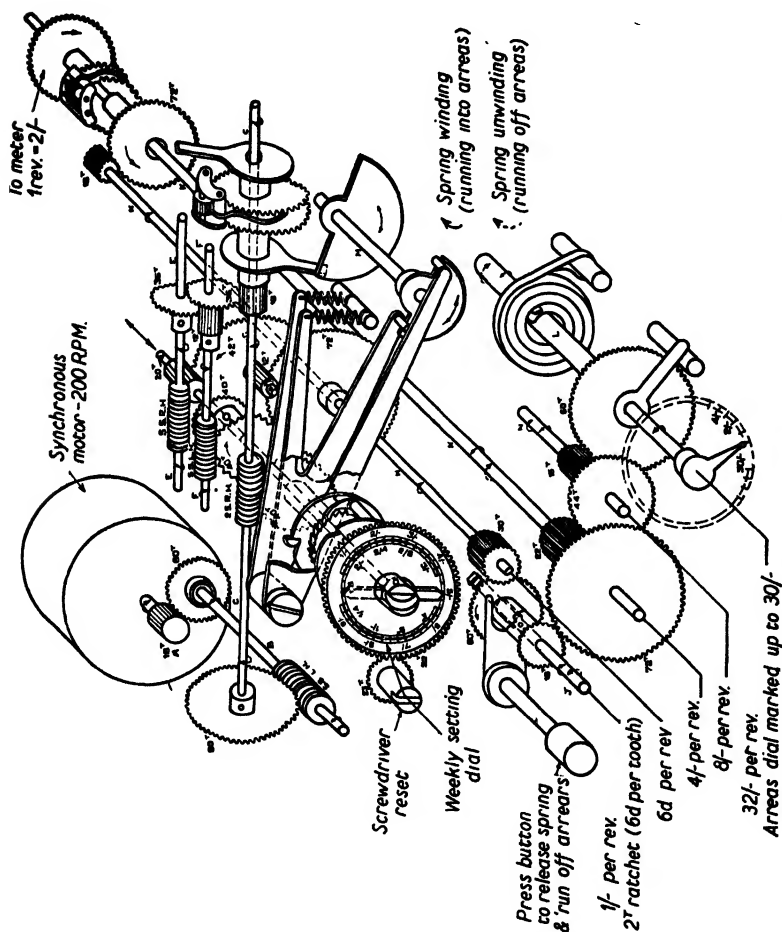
Arrangement of gearing in Smith prepayment meter.
